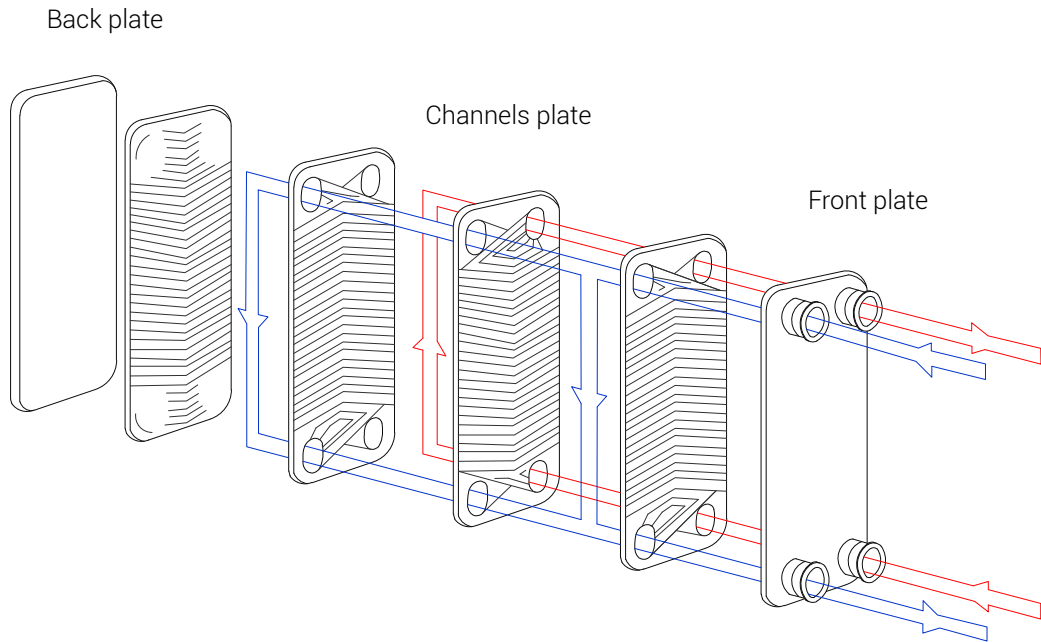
Schematic exploded view diagram of a brazed plate heat exchanger.
